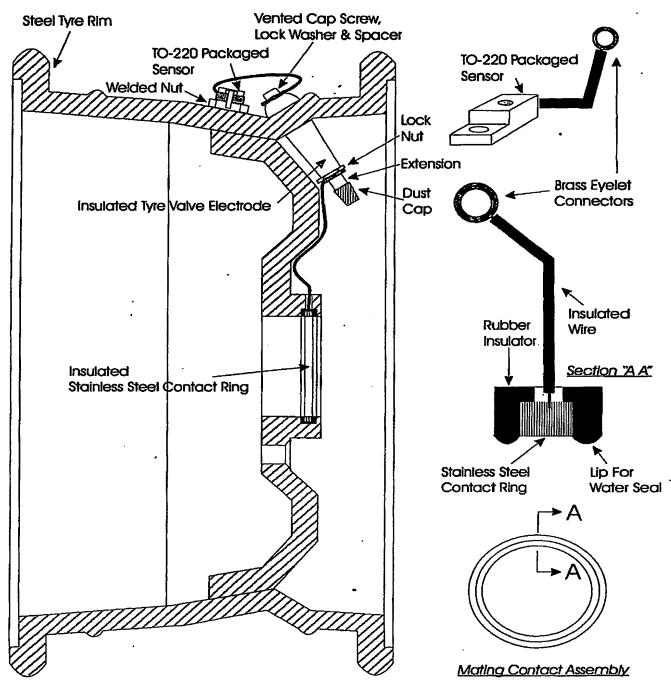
Steel Wheel Rim Showing Sensor Mounting And Electrical Connection To Hub Mating Contact Assembly
